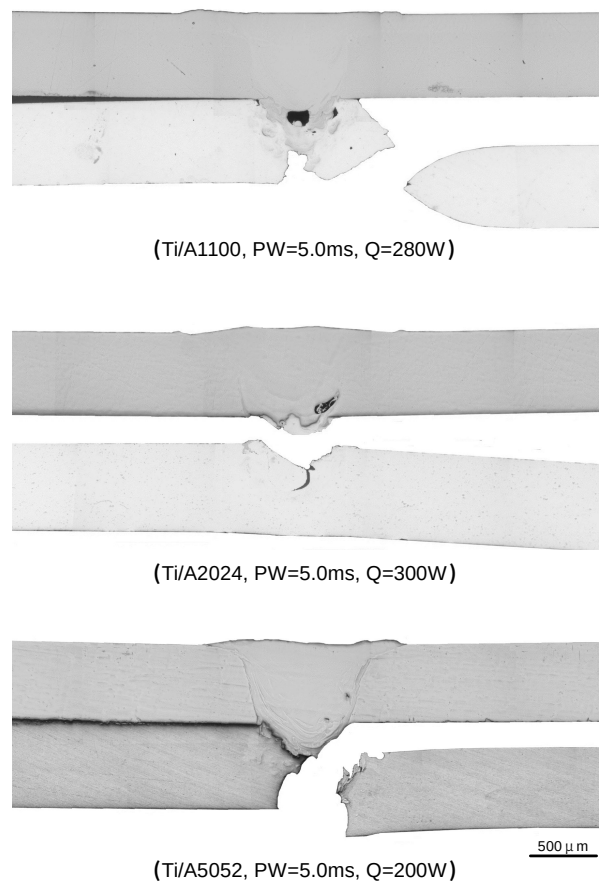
Macro-photograph of welded joint after tensile shear test.
